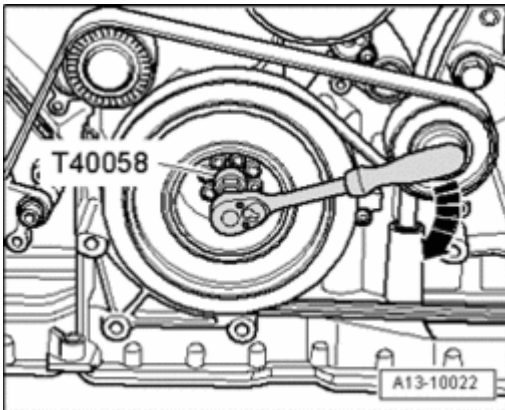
Loosening Torque Converter Bolts Using Adapter T40058
